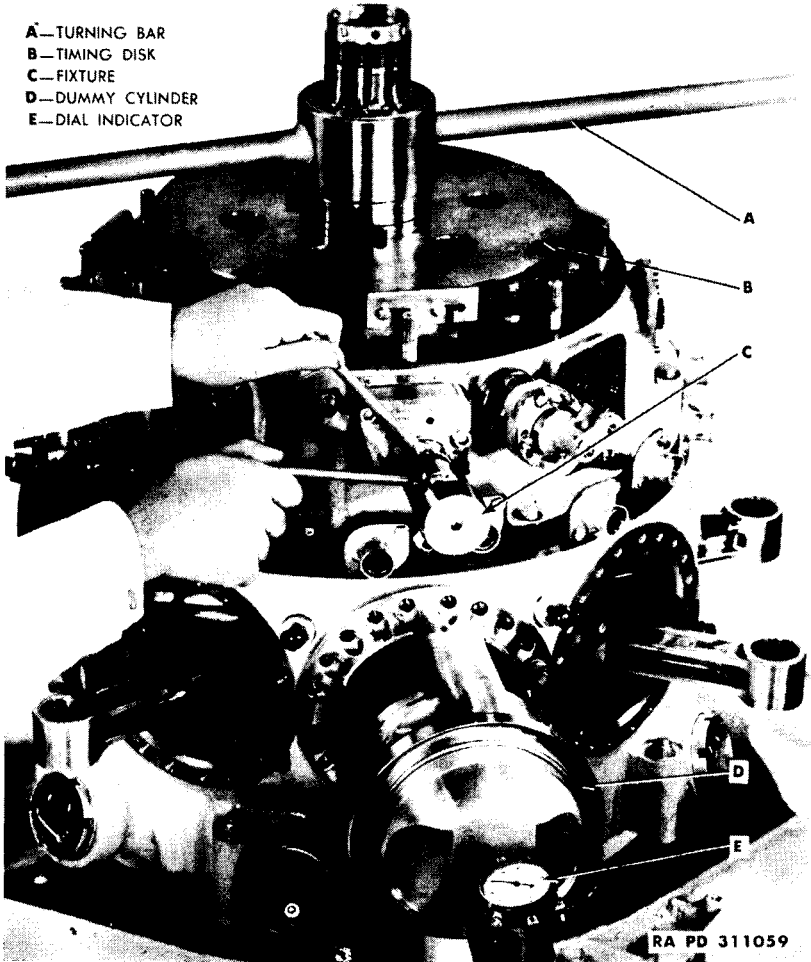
Adjusting Fuel Pump Lifters, Using Bar 5A2165, Disk 5A2164, Fixture 5A1368, and Cylinder 5A2183
